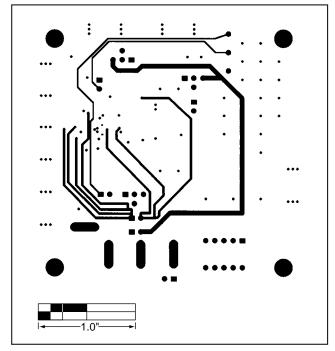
MAX2424/MAX2426 EV Kits PC Board Layout—Power Plane
